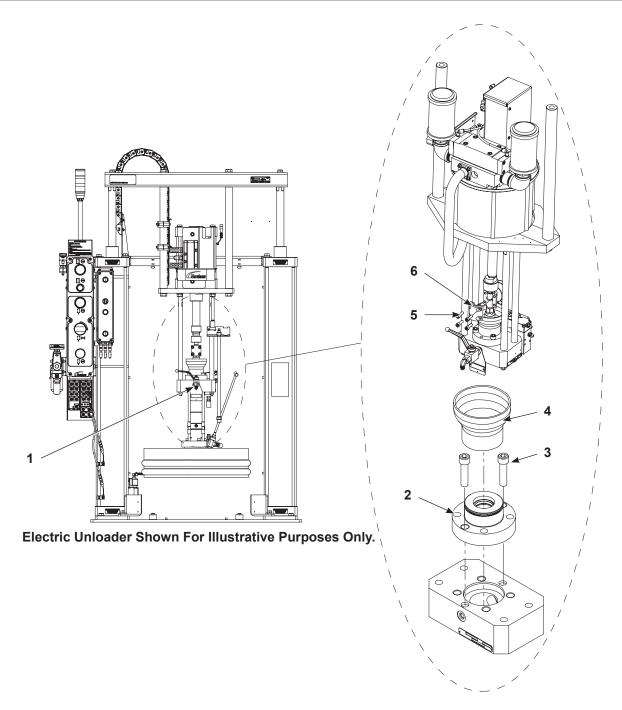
Repair Non-ARW Type Packing Gland Assembly
